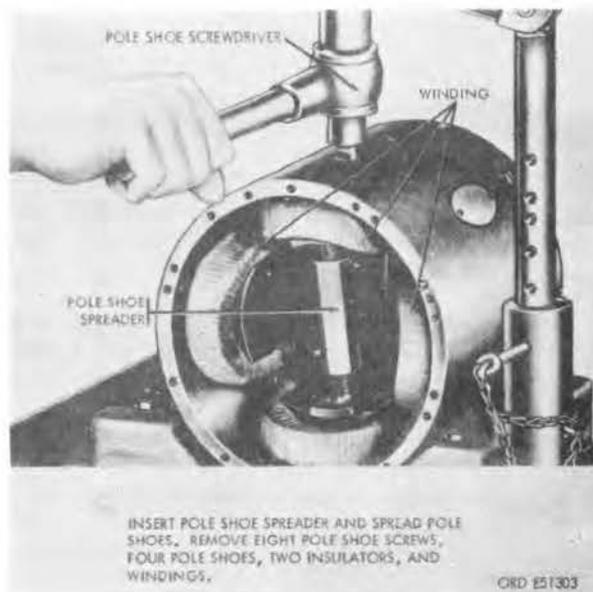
REMOVING POLE SHOES AND WINDINGS.
